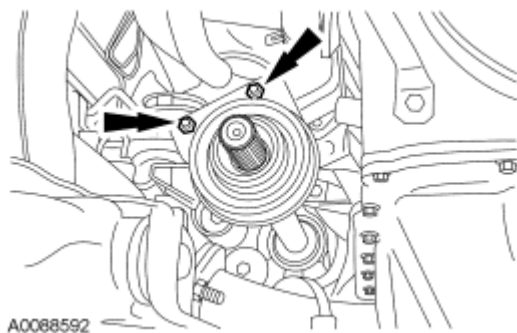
Locating Intermediate Shaft Retaining Nuts
